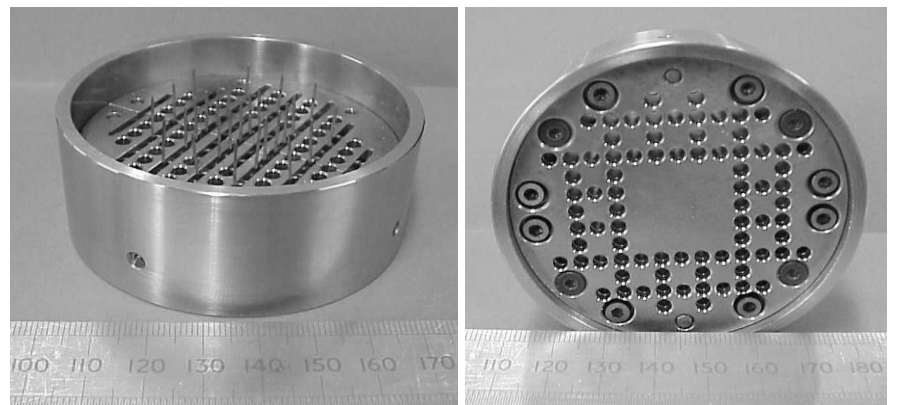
Stainless steel pin fixture used for securing the first layer of a multi layer build.
